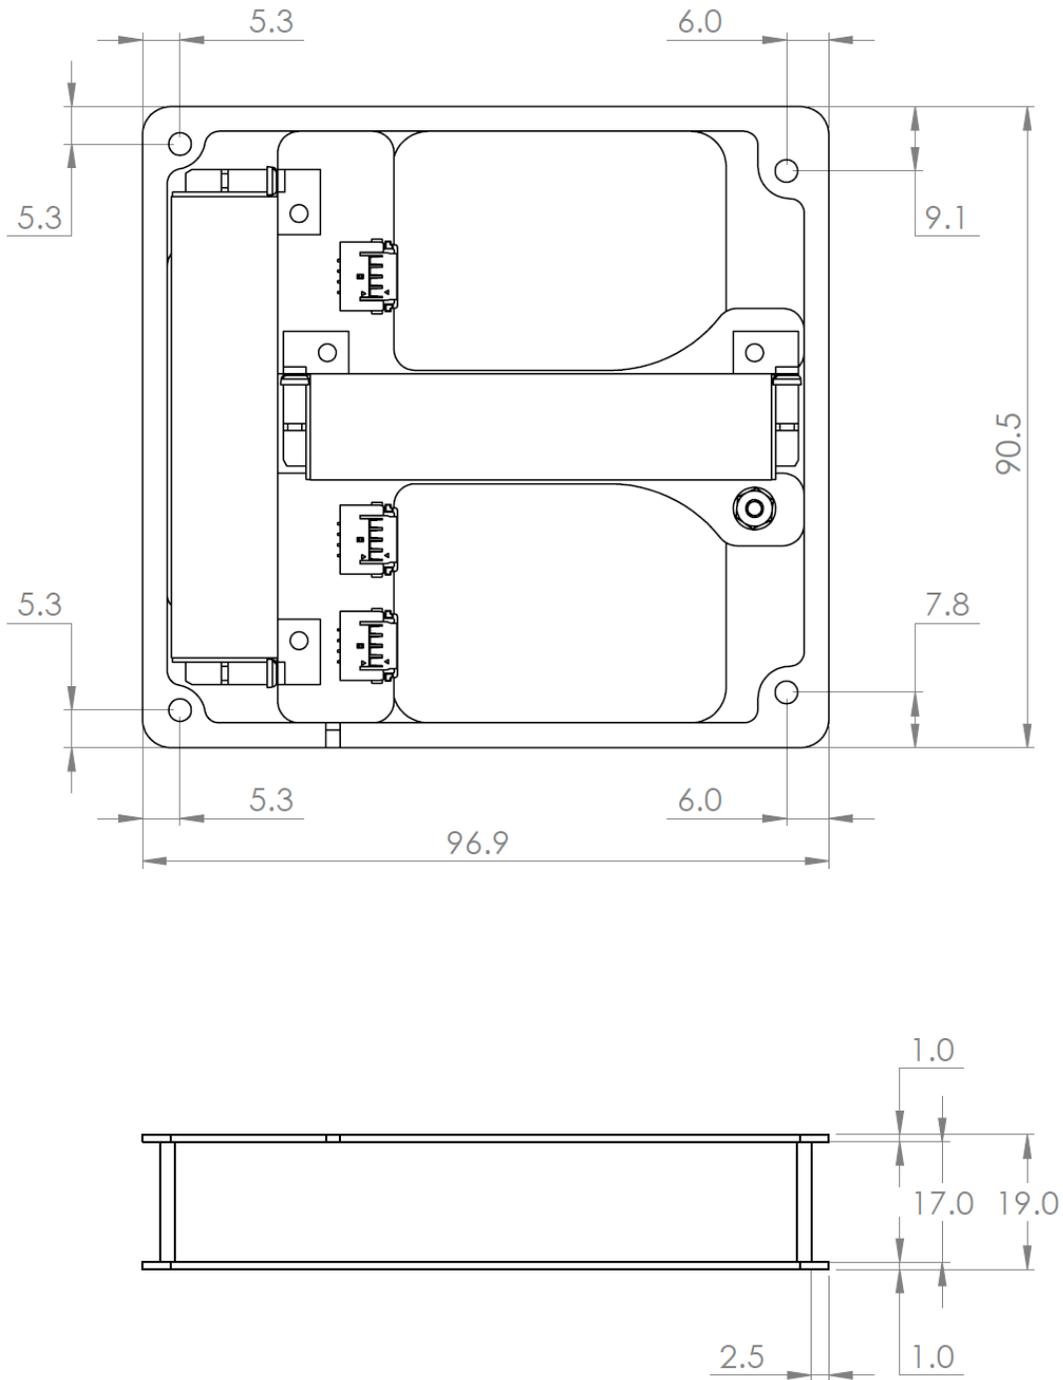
MTQ Assembly Drawing Dimensions ⁵
